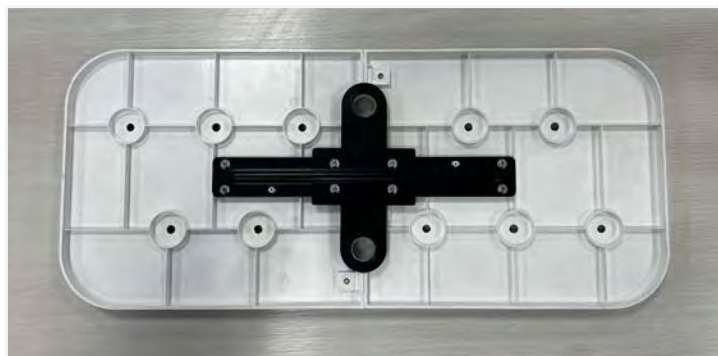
Front view of the thread stand with the screws fully inserted and secured.
